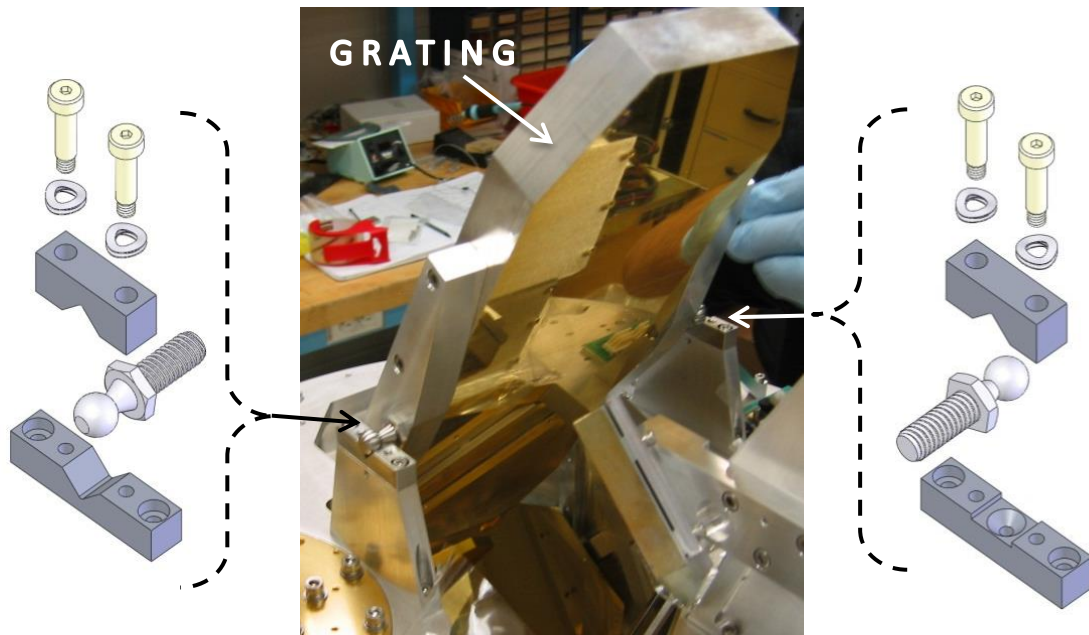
A picture of the grating mounted in ZEUS-2 with V blocks removed (center). An exploded diagram of the left and right mounting structures showing the V-ball-V joint (left) and the cone-ball-V joint (right), respectively, allowing grating rotation.
